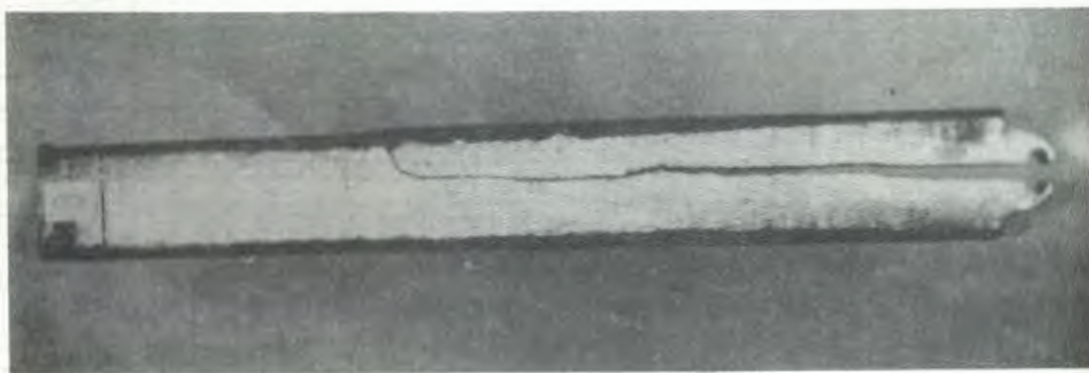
Robertson wide plate test. Load was applied to two first elements and no load was applied on the third element. Note the crack arrest as soon as the crack reaches the non-stressed section.
